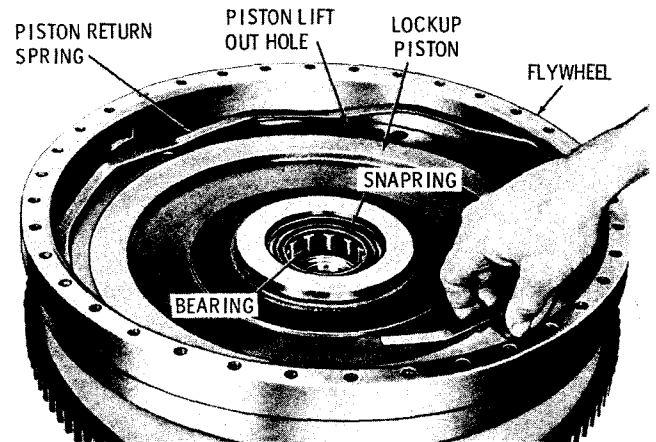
Removing lockup clutch piston return spring (CLT, CLBT, VCLT, VCLBT)
